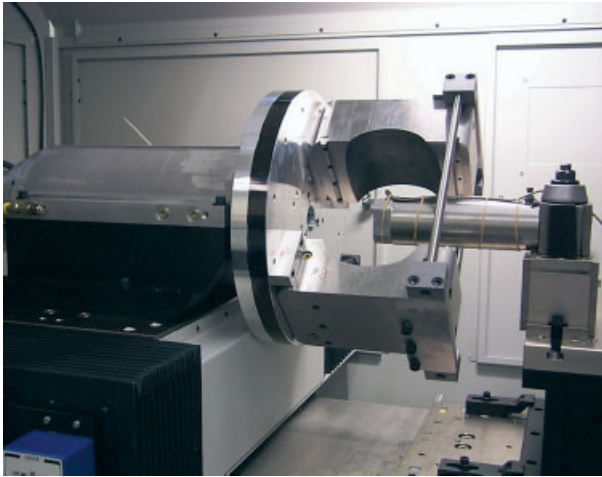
Off-axis machining of large molds. (Courtesy of Precitech Inc.)
